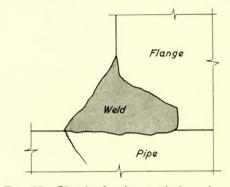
Sketch showing typical section of weld with junction crack
